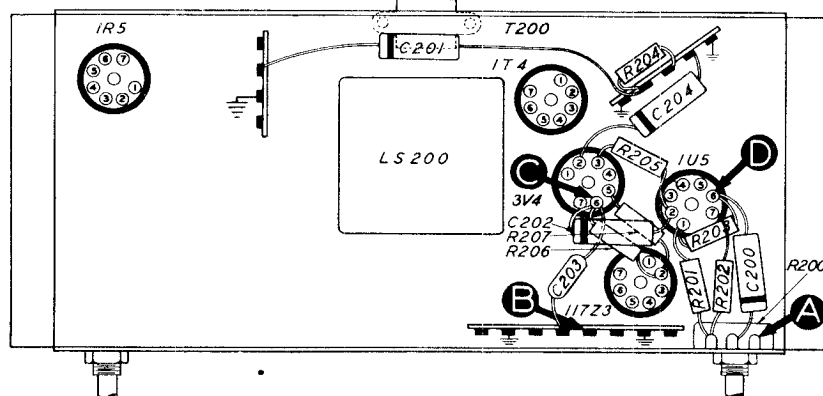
BOTTOM VIEW, SHOWING SECTION 2 TEST POINTS
